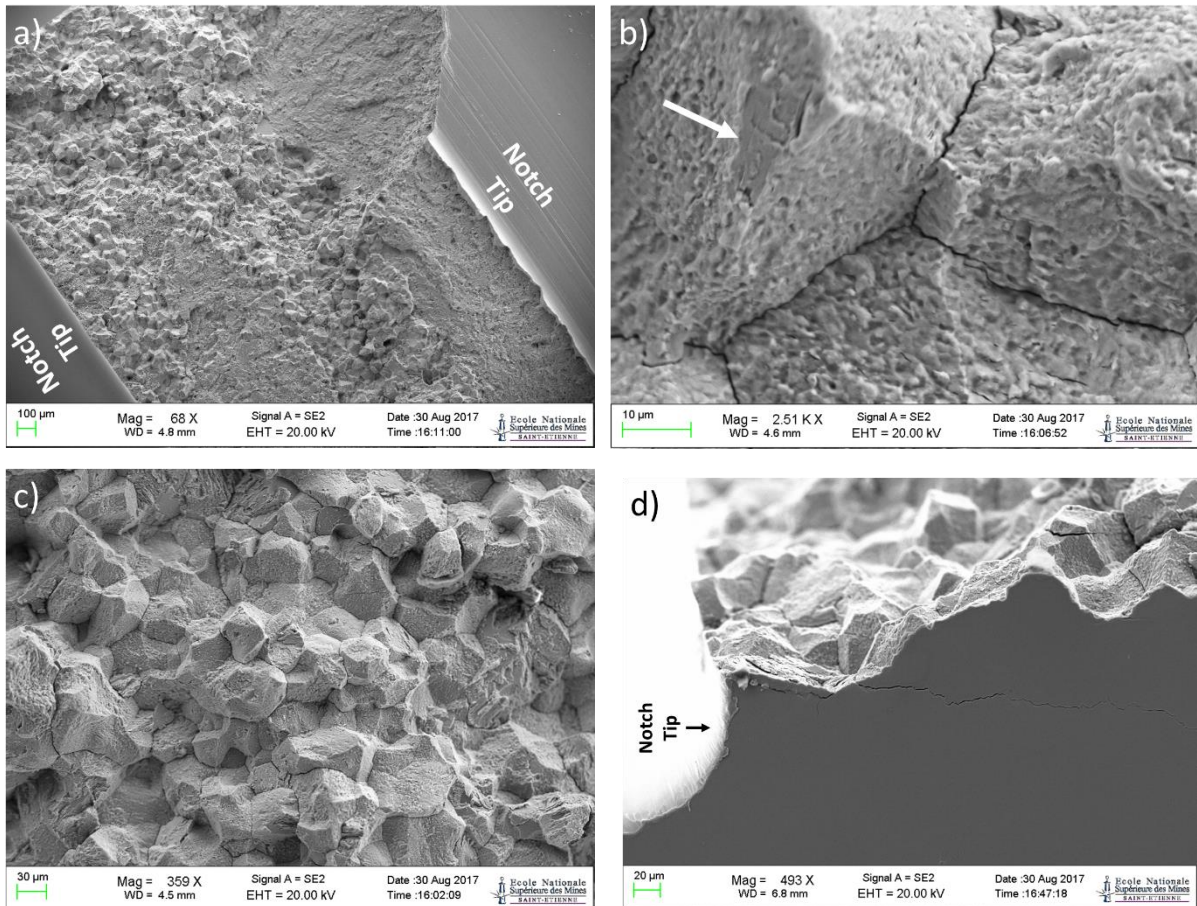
Fracture surfaces of the constant displacement specimen.
